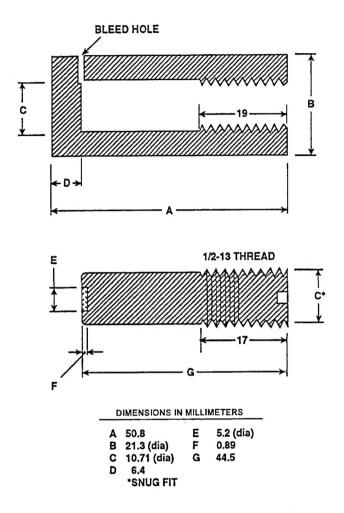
TEFLON SAMPLE CAPSULE: CAP (TOP) AND THREADED PLUG
